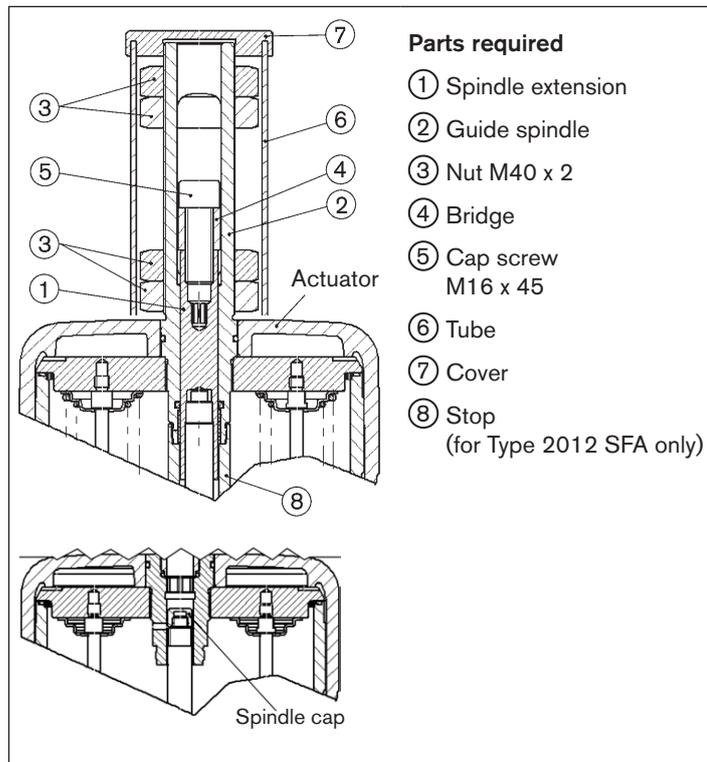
Actuator size 175, 225 (Ø in mm)
